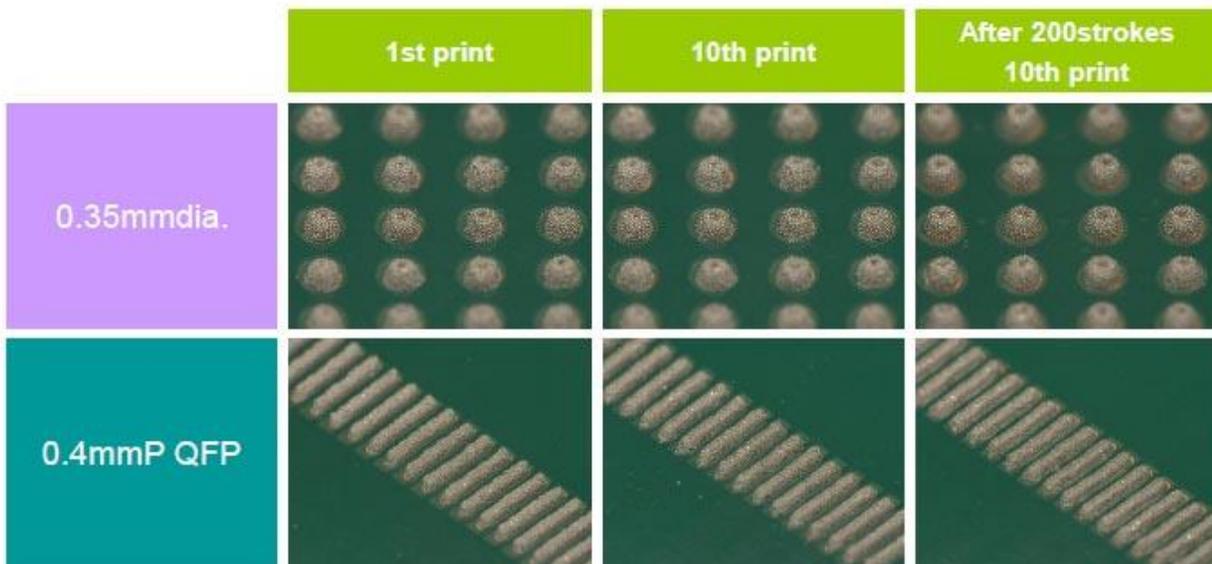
Crack-free Paste A printing results on 0.35mm diameter pads and 0.4mm pitch QFP component pads.
